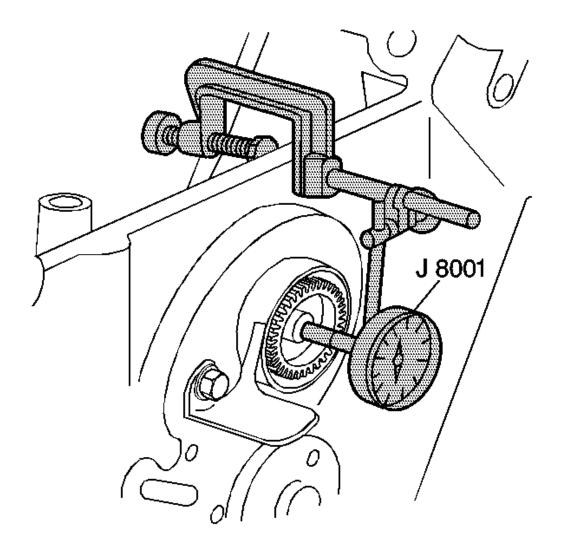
Measuring Balance Shaft End Play Courtesy of GENERAL MOTORS CORP.
